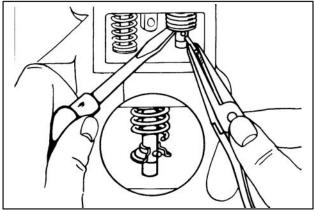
REMOVING VALVES AND REPLACING VALVES
